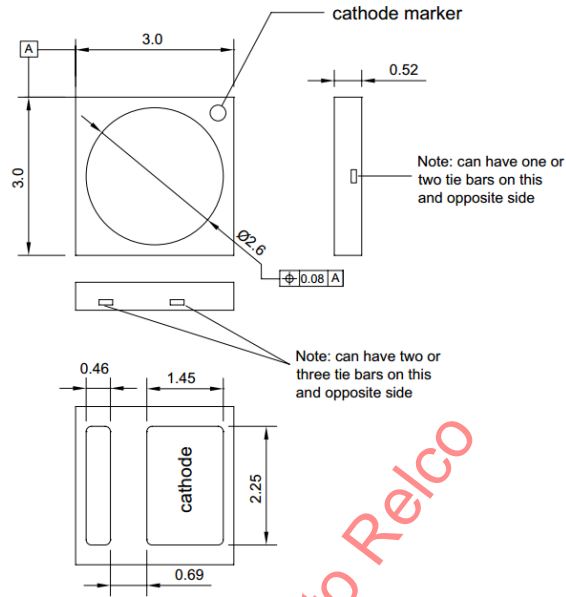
Mechanical Drawing for LUXEON 3030 2D Round LES. All dimensions are in millimeters.
